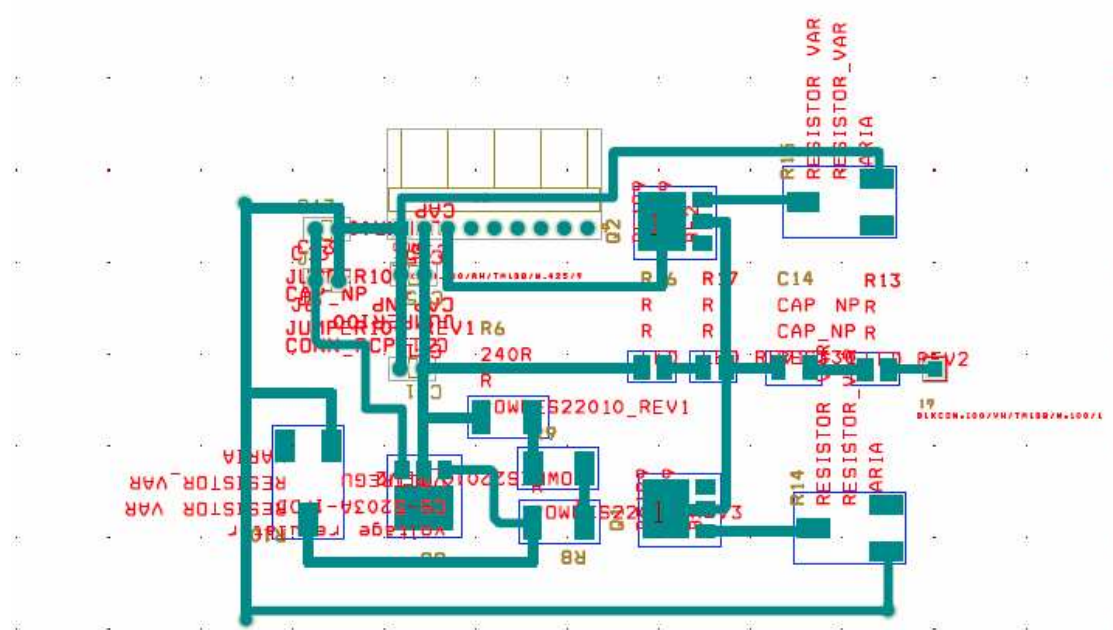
Printed circuit board footprints for the radio to fibre optic driver unit
